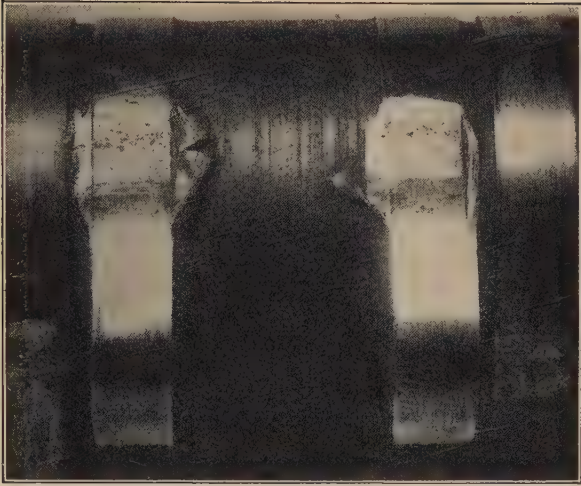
Camshaft of French automobile, failed after short service due to a too small case-hardening depth.
